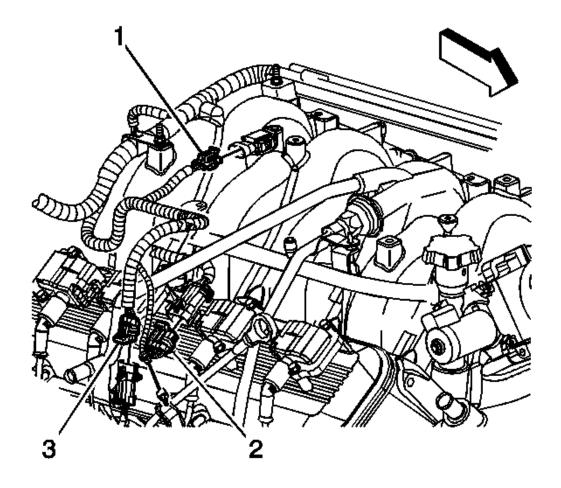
View Of Ignition Coil, ECT And MAP Sensor Electrical Connectors Courtesy of GENERAL MOTORS CORP.
